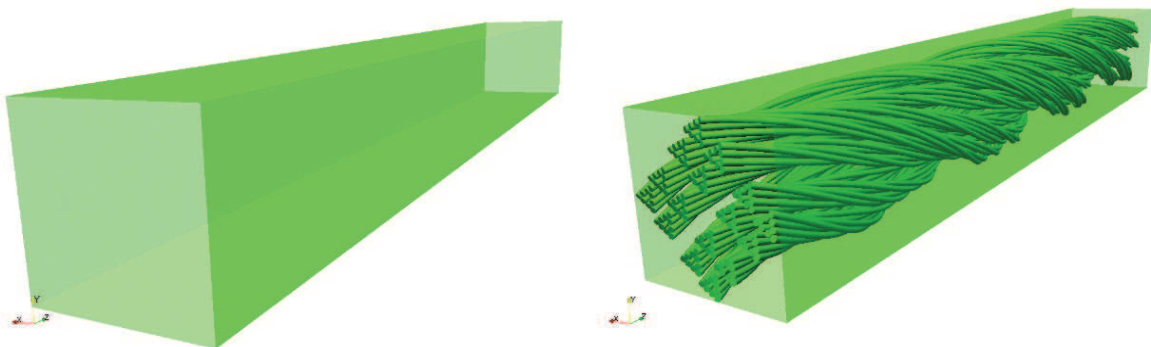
Illustration of square tool around initial strand assembly (3x3x4x4).
